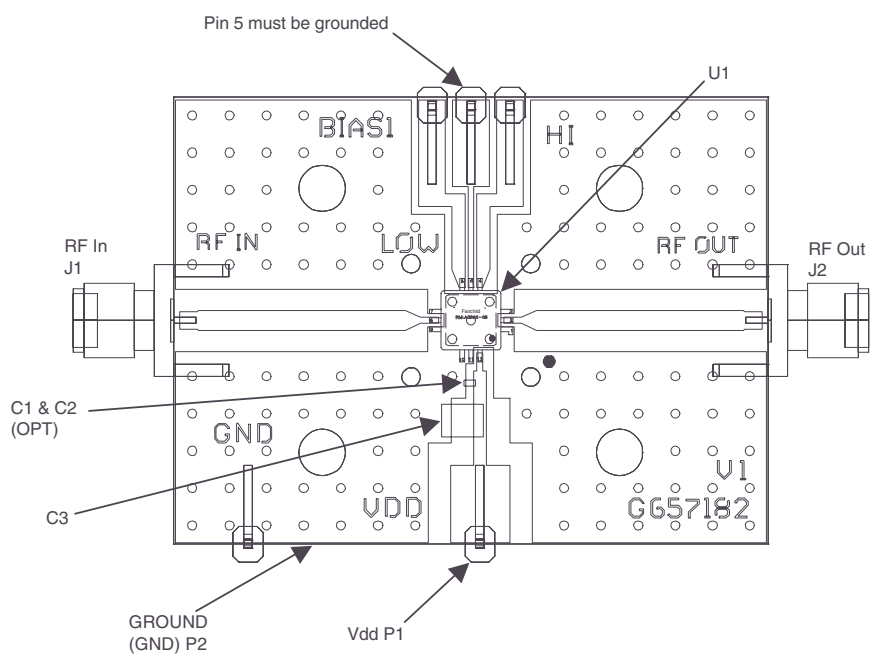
Layout and Assembly of Test Evaluation Board (RMLA3565C-TB)
